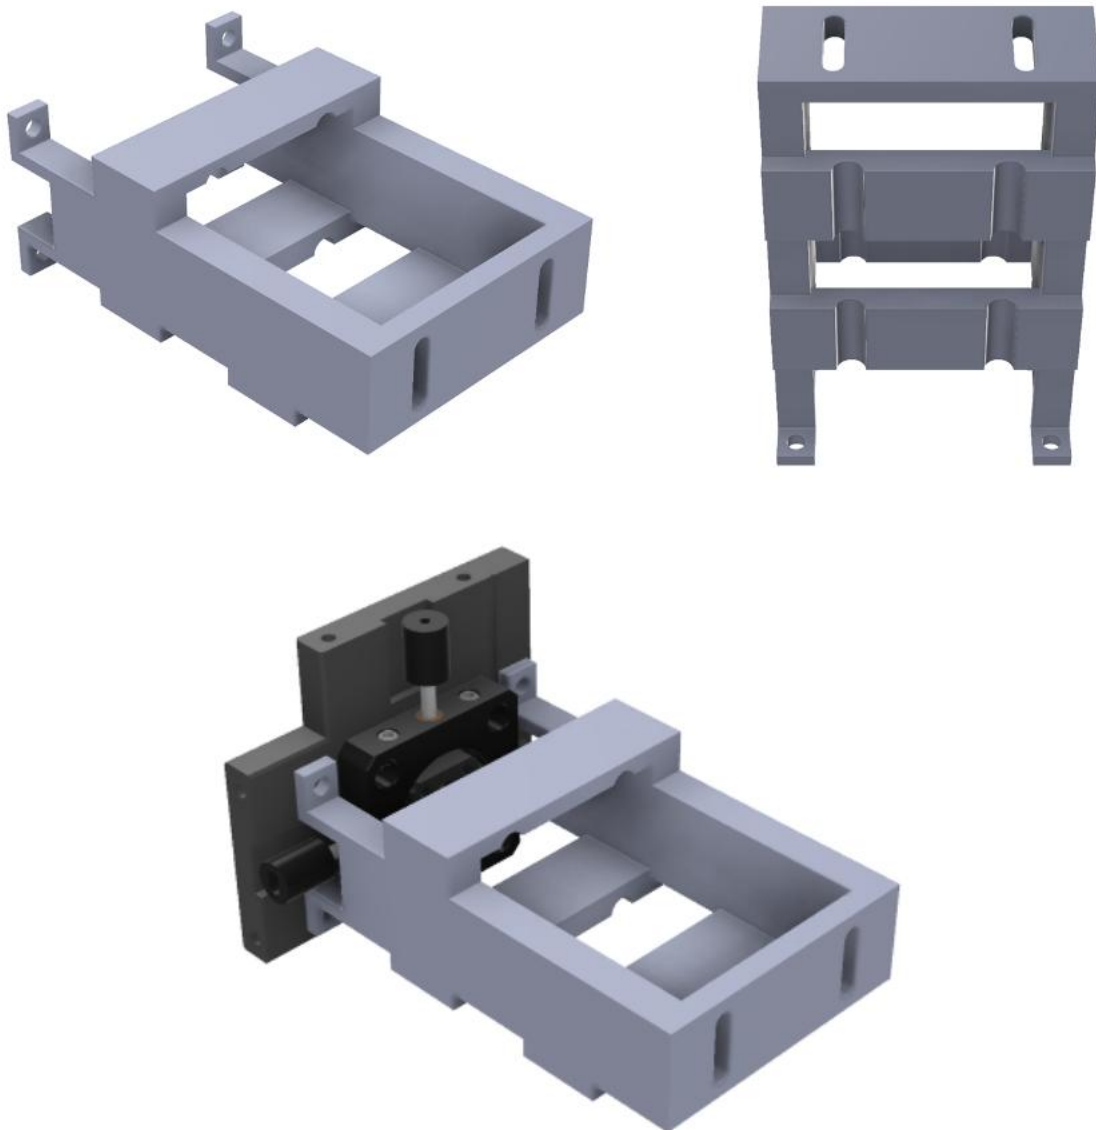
Z-Axis Bracket: Final Concept with Load Bearing Runners
